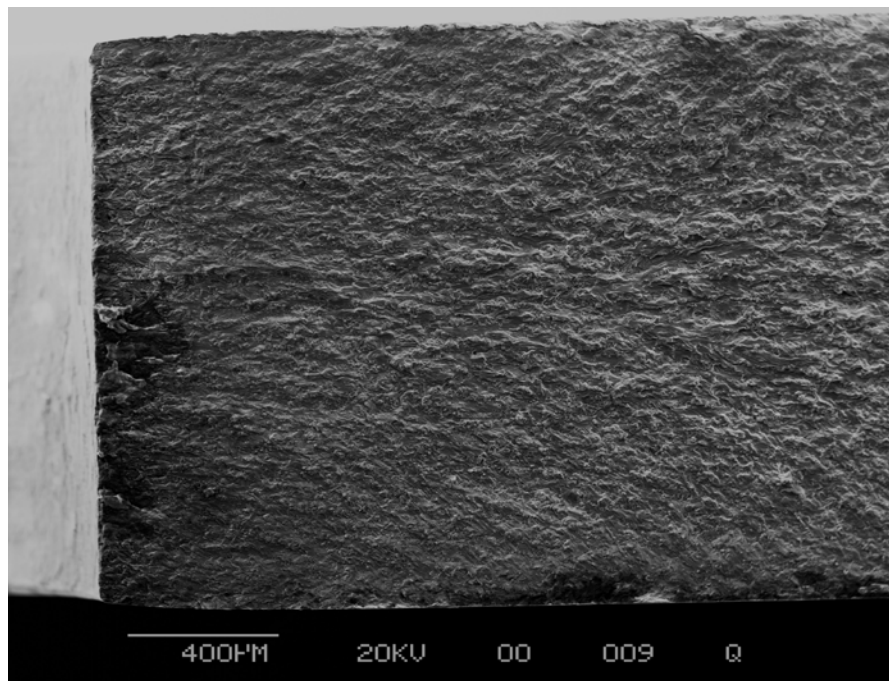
Fracture surface of specimen 8 showing crack initiation area
